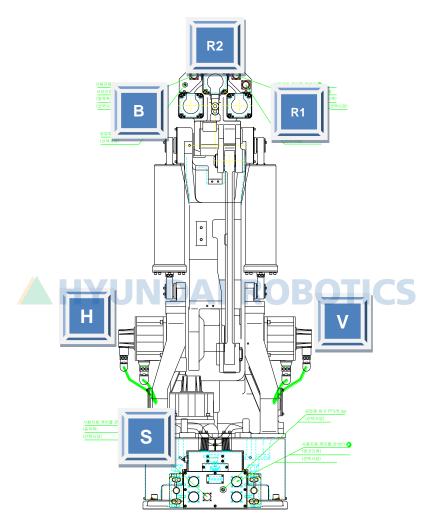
Locations of each axis' motor (HX165 robot)
